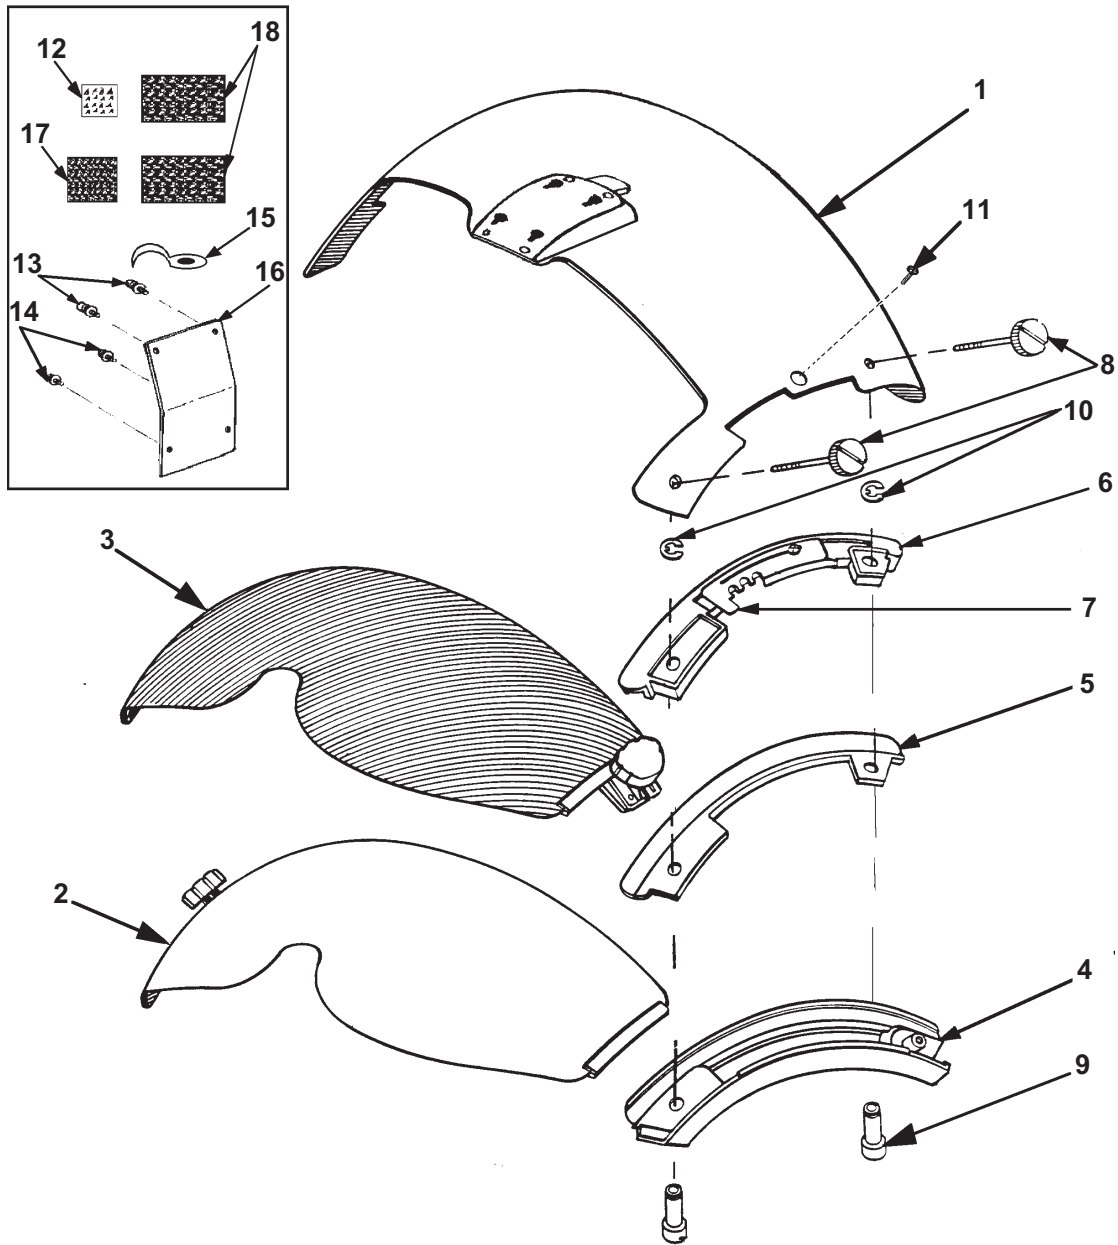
ANVIS Quick-Disconnect Dual Visor Assembly
